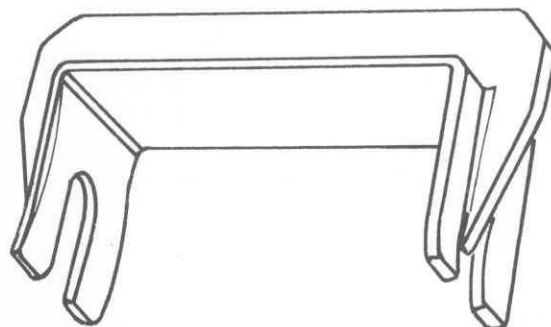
3 Tool A.72235 for retaining the wheel cylinder pistons when the shoes are removed
